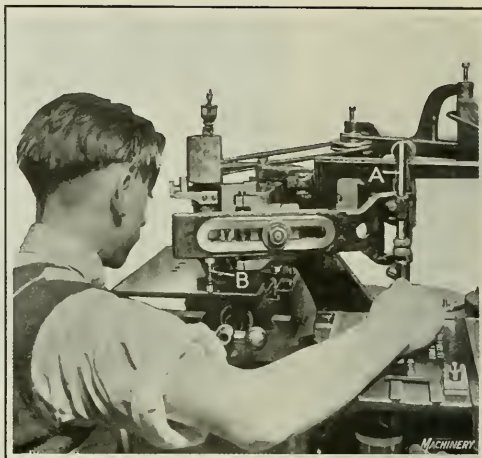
Engraving Bakelite Tuner Panels on Pantograph Engraving Machine
